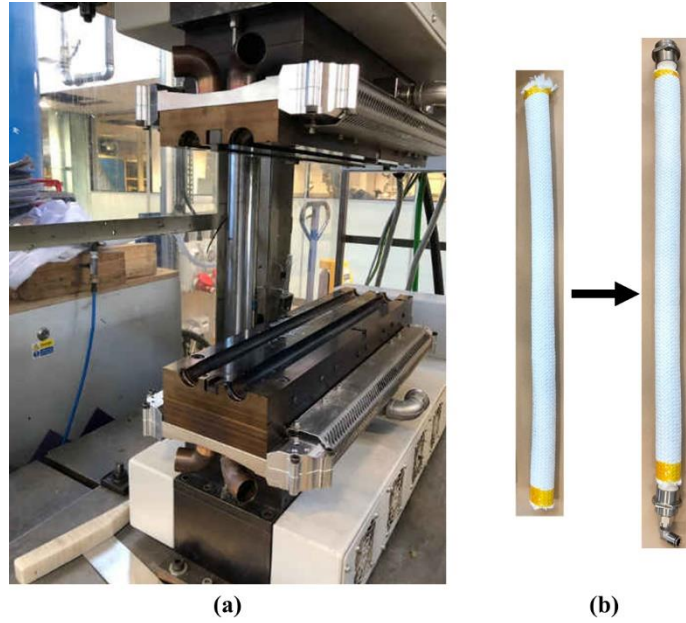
(a) RVM tool used for moulding of braided beams and (b) preparation of bladder-preform assembly from braided fabric
